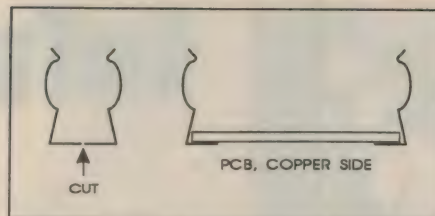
Cut the fuse holder bracket in half, and solder the pieces to the PCB as shown. These make electrical contact with the fittings in the battery holder.
